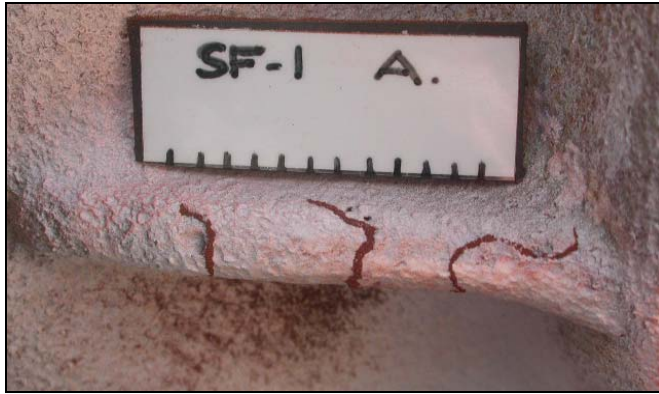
Defects Identified using Dry Magnetic Particle Inspection
